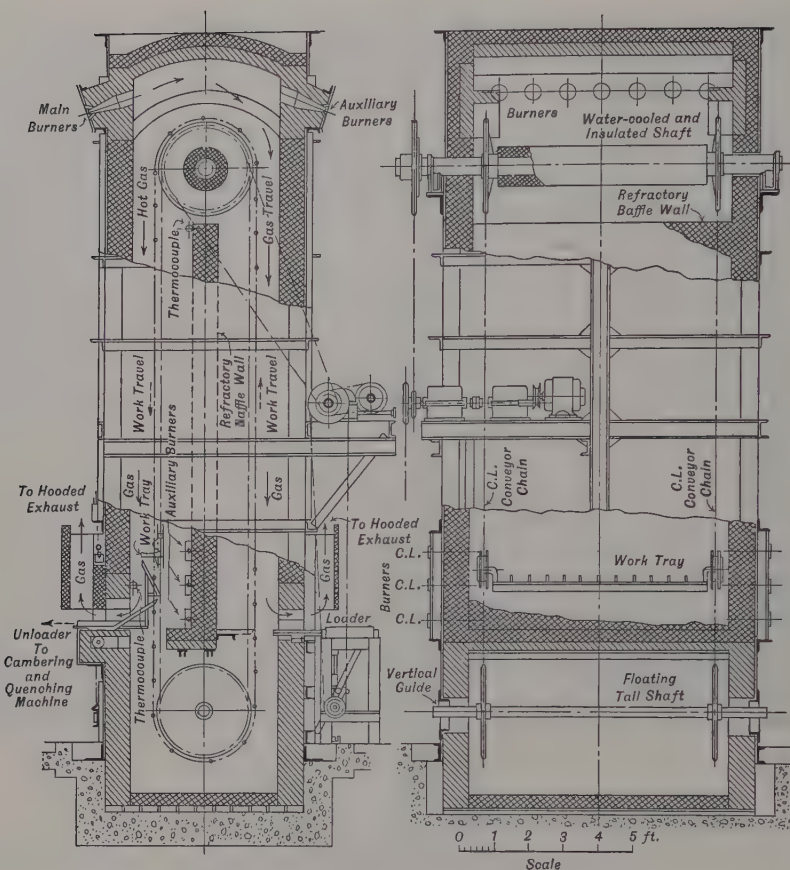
Vertical conveyor in furnace for heating spring leaves.
